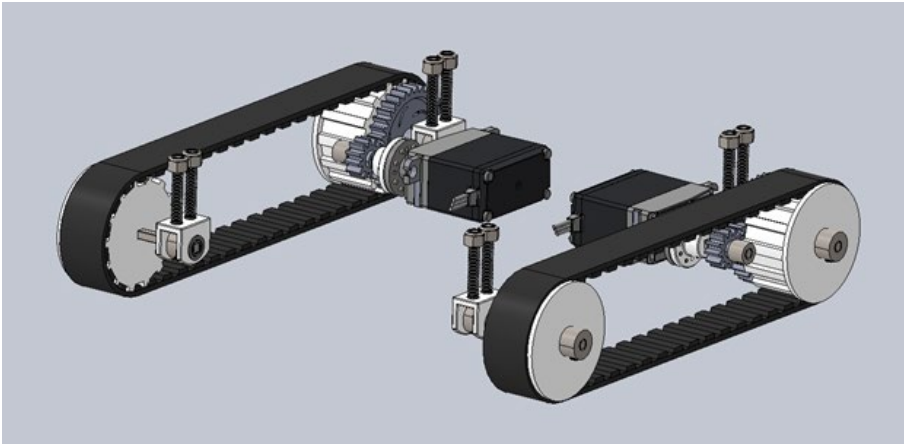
Drivetrain continuous track CAD model in SOLIDWORKS.
